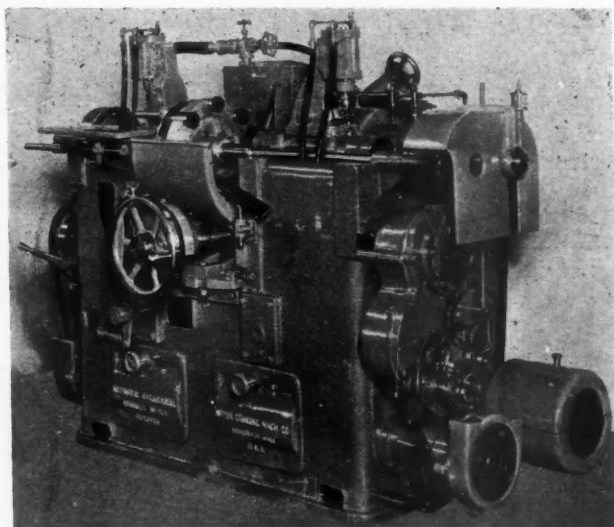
Grinding two diameters and shoulder of stud is done in the machine pictured above. The installation is also tooled for valve stem guides
